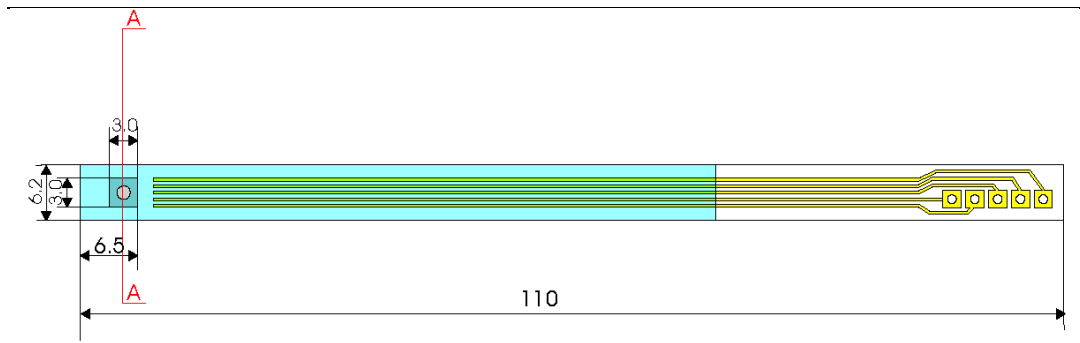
ISFET Mounted On A Long Probe Stick (All Dimensions Are in Millimeters)
